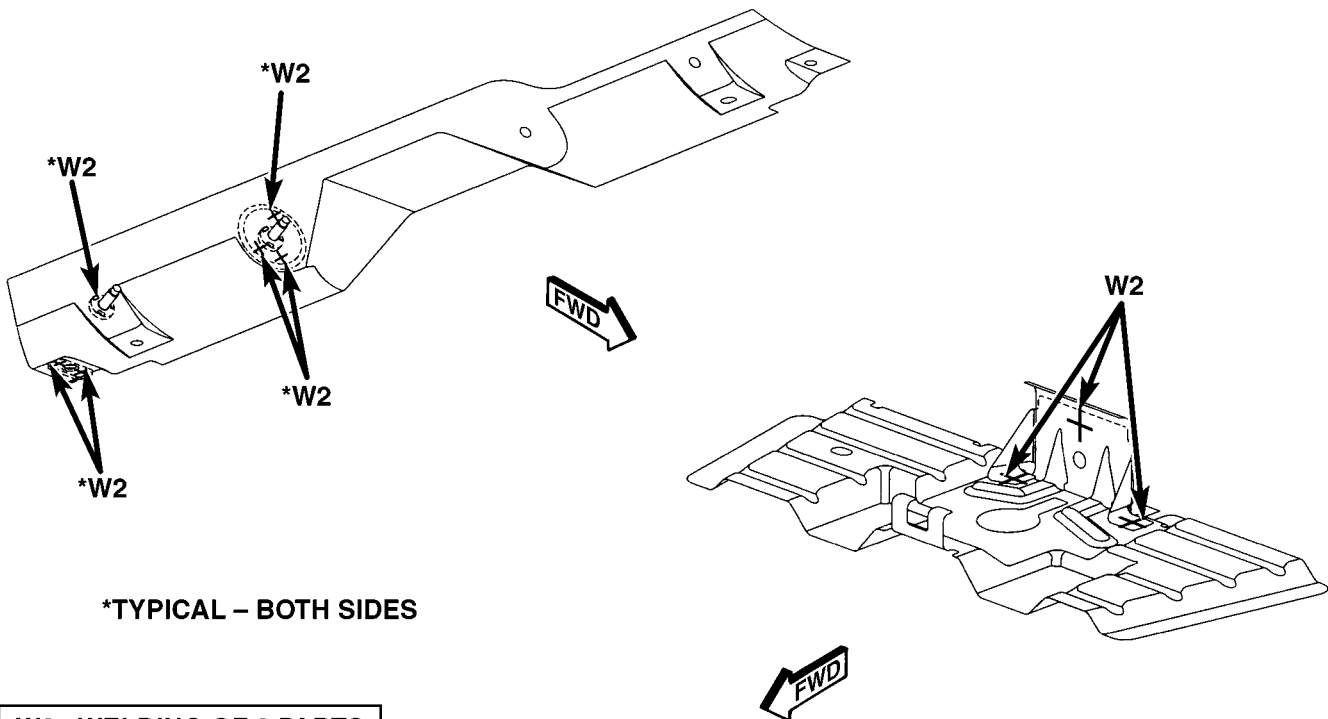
SPARE WHEEL ANCHOR REINFORCEMENT FUEL TANK SUPPORT BRACKET TO REAR FLOOR PAN
